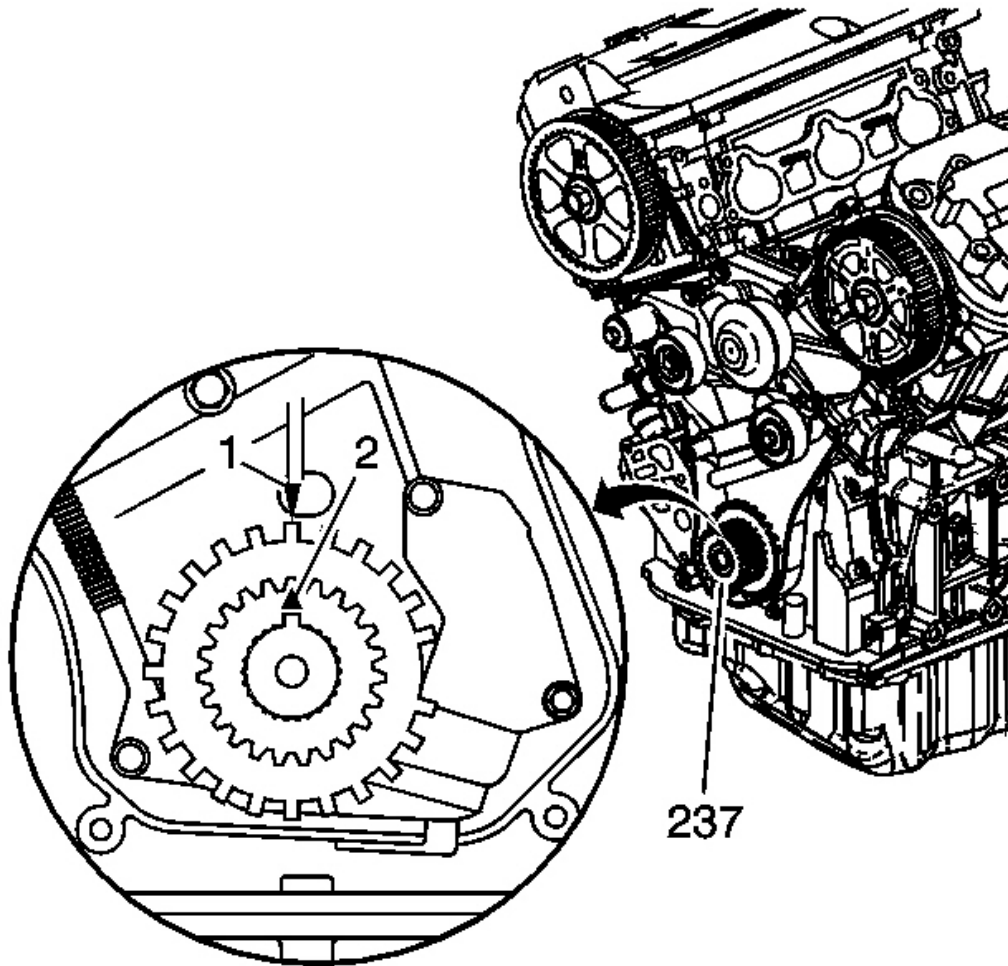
View Of Crankshaft To Align The Mark On The Sprocket With The Pointer
